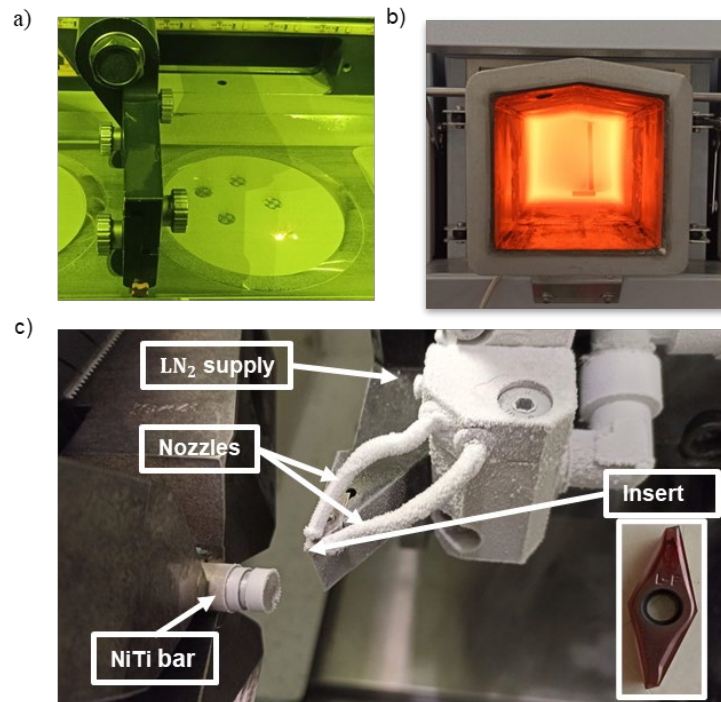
Process chain for fabricating the NiTi samples: a) LPBF, b) heat treatment, and c) finishing machining (here shown with the cryogenic cooling apparatus).
